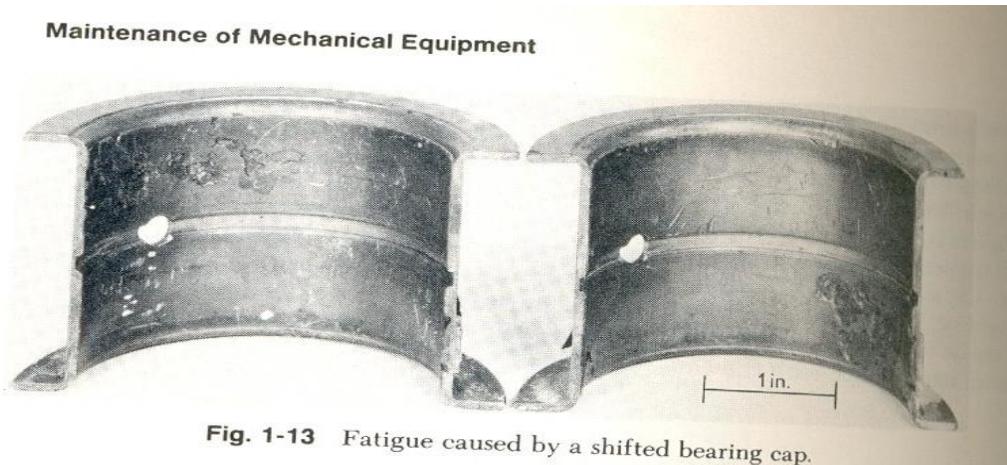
Fatigue caused by a shifted bearing cap.
